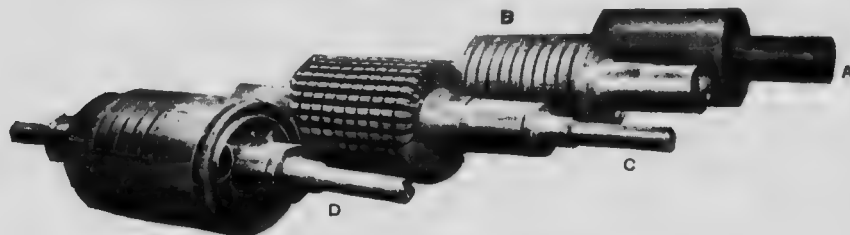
Construction of Rotors for Small Turbo-Alternators.
